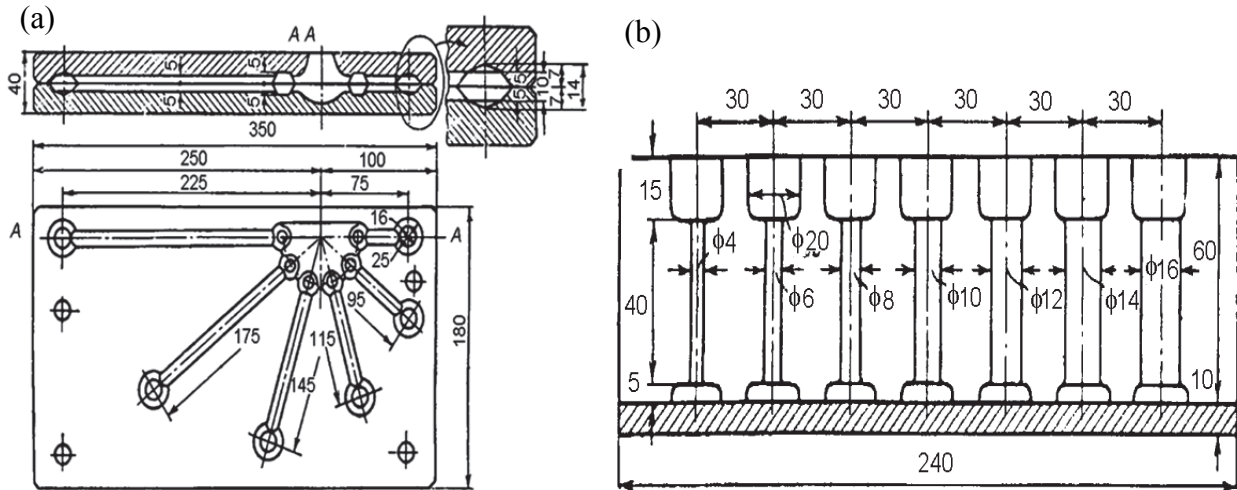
Constrained rod casting mould with variation of casting (a) length and (b) diameter [6]
